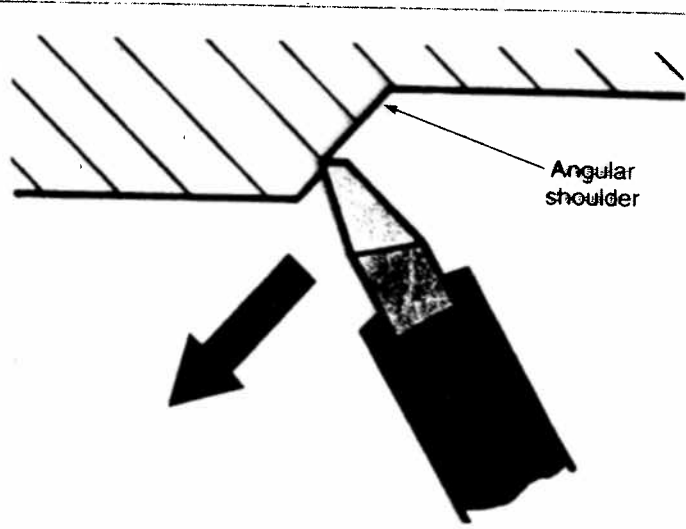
To machine an angular shoulder, cut is made from smaller diameter to larger diameter.
